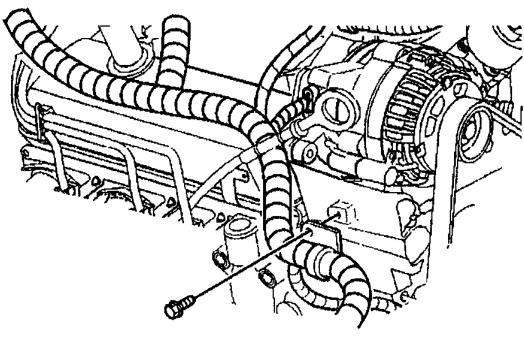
Locating Crankshaft Position Sensor & Wiring Harness Components Courtesy of GENERAL MOTORS CORP.
